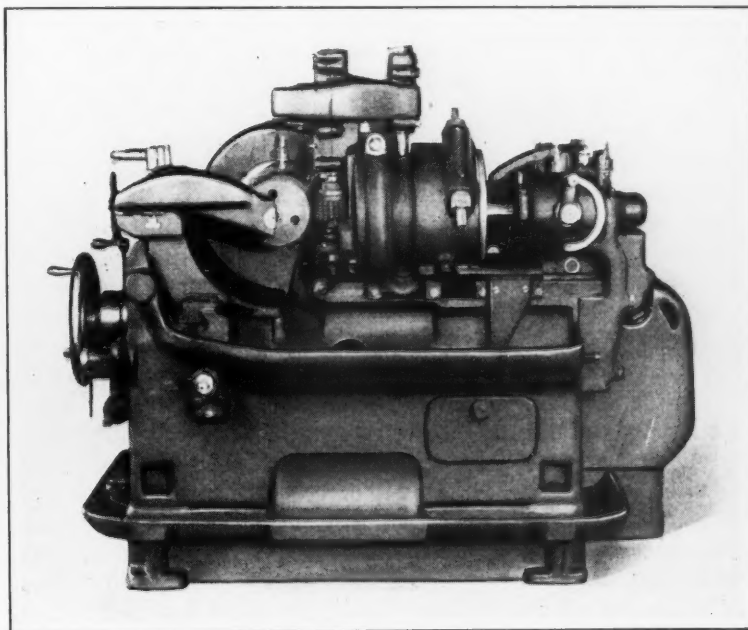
Right-hand View of Machine Showing Gears and Hob in Place
